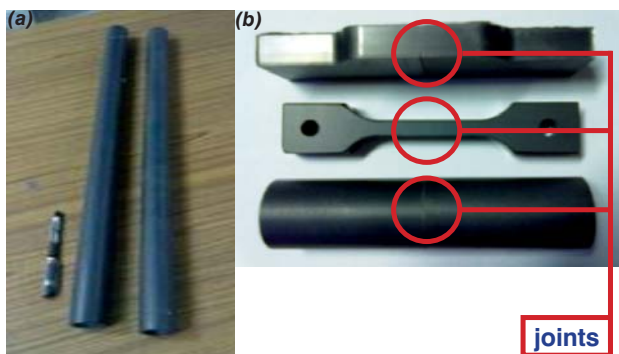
(a) Sintered SiC tube (b) braze joined SiC parts
